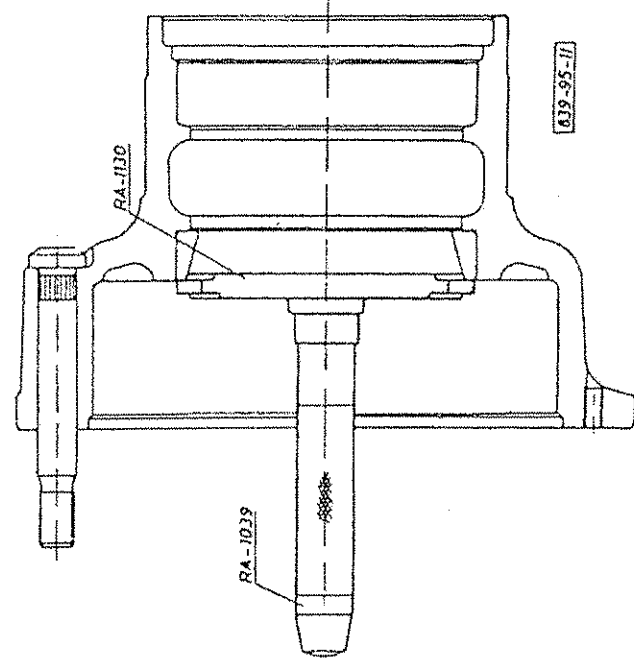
PRESSING IN THE CUPS OF THE TAPER ROLLER BEARINGS
